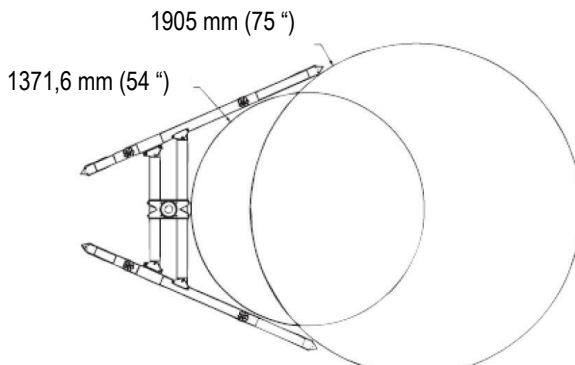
, Range of Opening Sizes for Jackpod Base Portable
